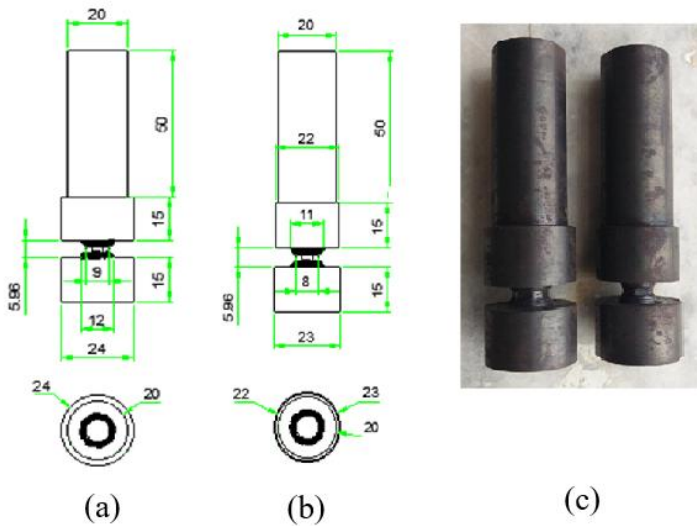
Tool-2 and 3, (a) Tool-2, 2D sketch, (b) Tool-3, 2D sketch, (c) Actual
